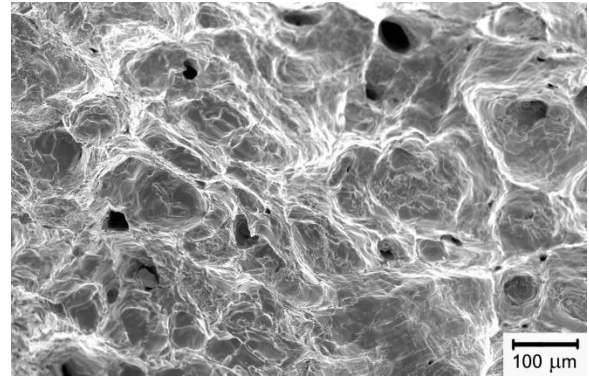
Ductile dimple fracture surface of Sn-3.0Ag-0.5Cu solder tested under a frequency of 0.1 Hz at 70°C.
